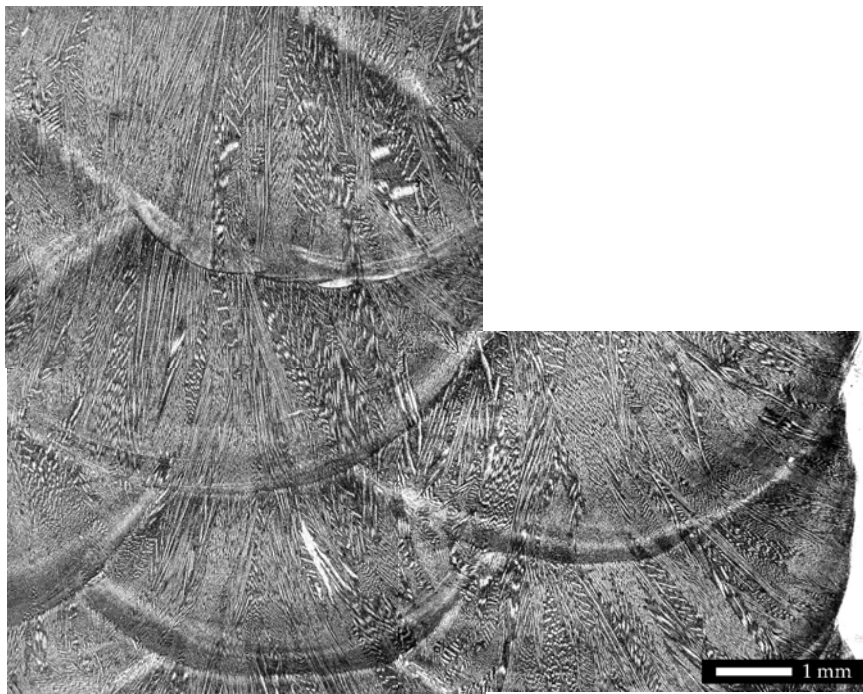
indicates the macroscopic structure of the weld. Reason for why the base material takes etching differently is that the plates in the joint are ordinary low alloyed steel and one is made of Inconel.
